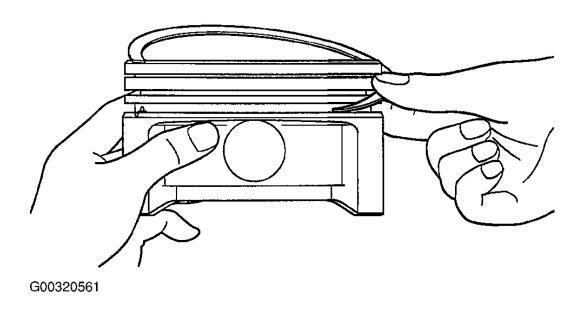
Installing Oil Ring Side Rail Courtesy of KIA MOTORS AMERICA, INC.
